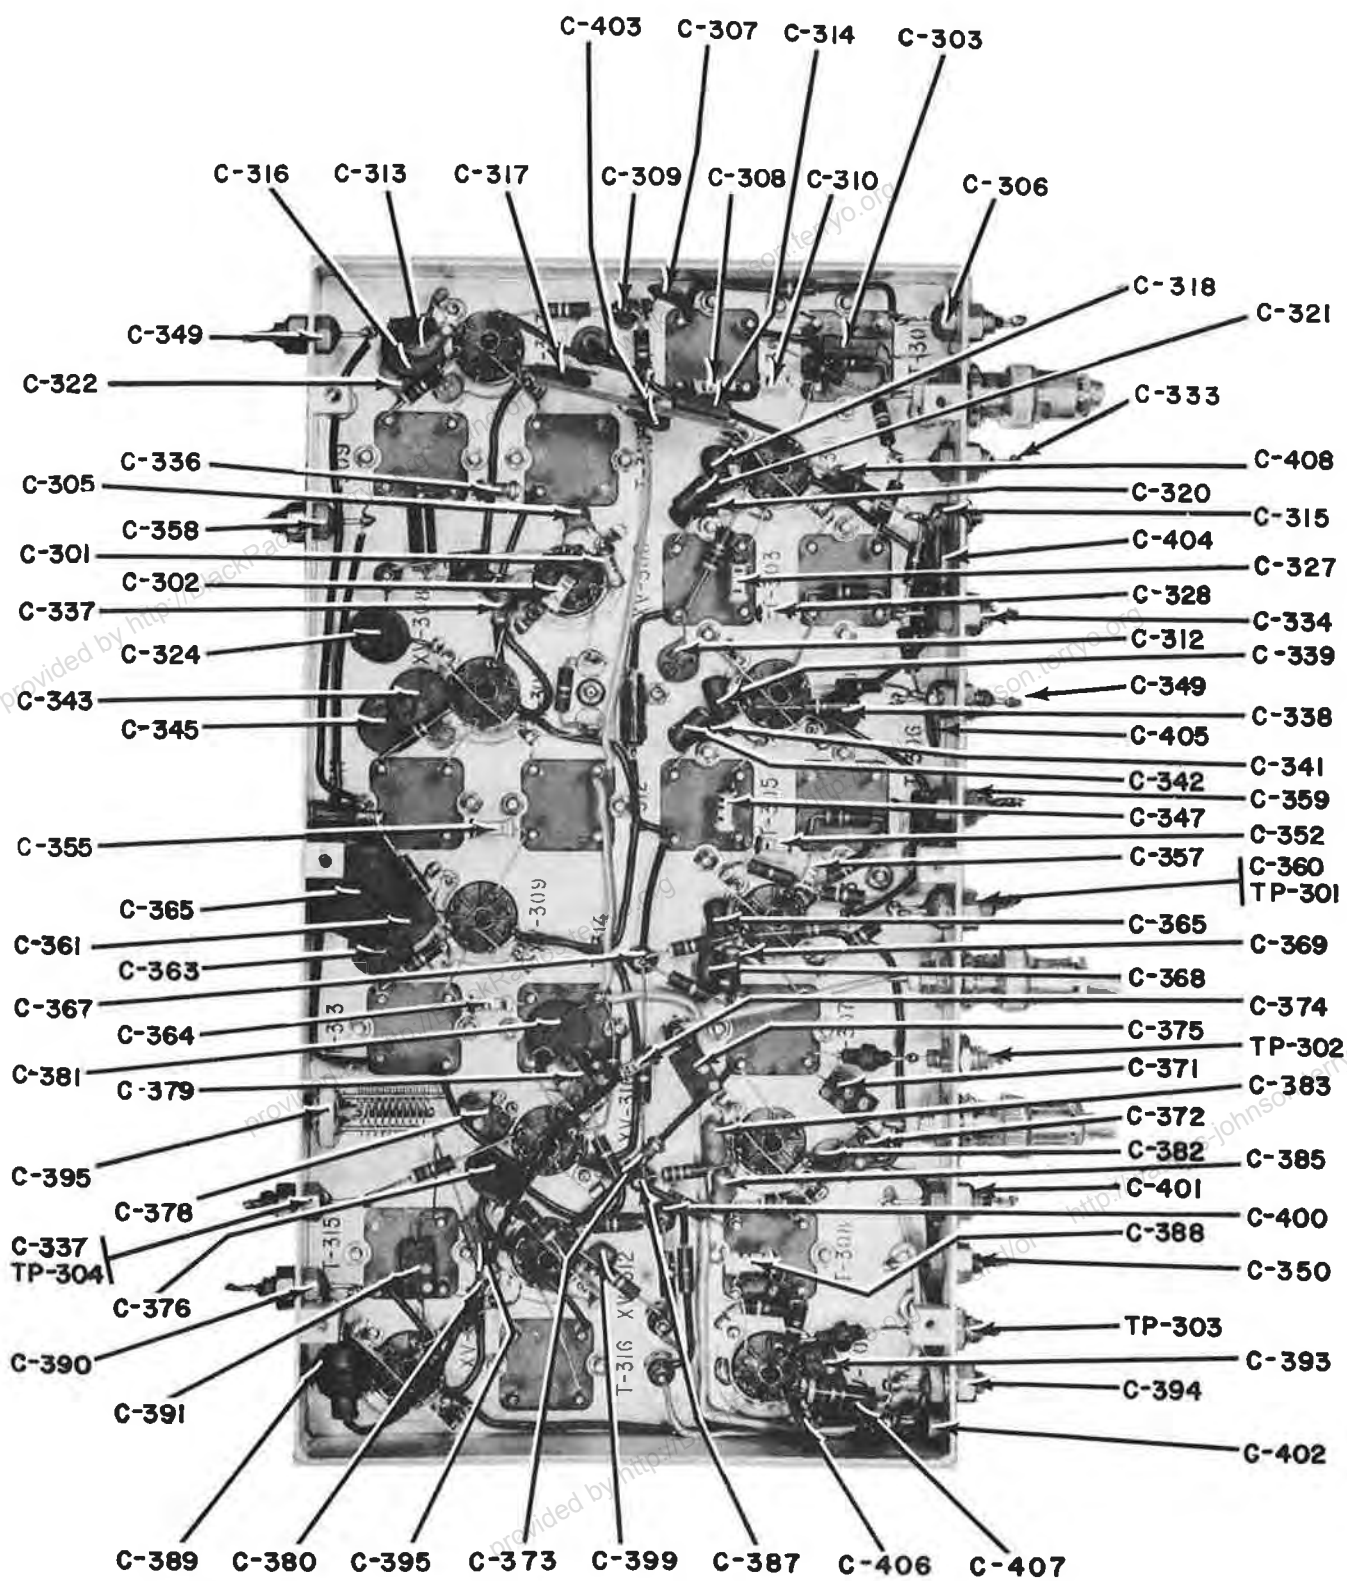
IF Strip, 1302-B Receiver, Bottom View, Location of Capacitors and Test Points
